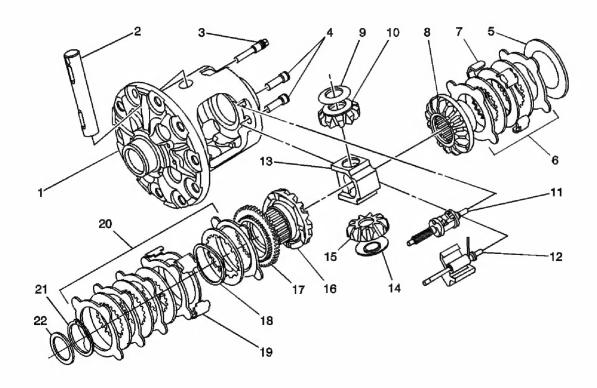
Locking Differential Disassembled View Courtesy of GENERAL MOTORS CORP.
